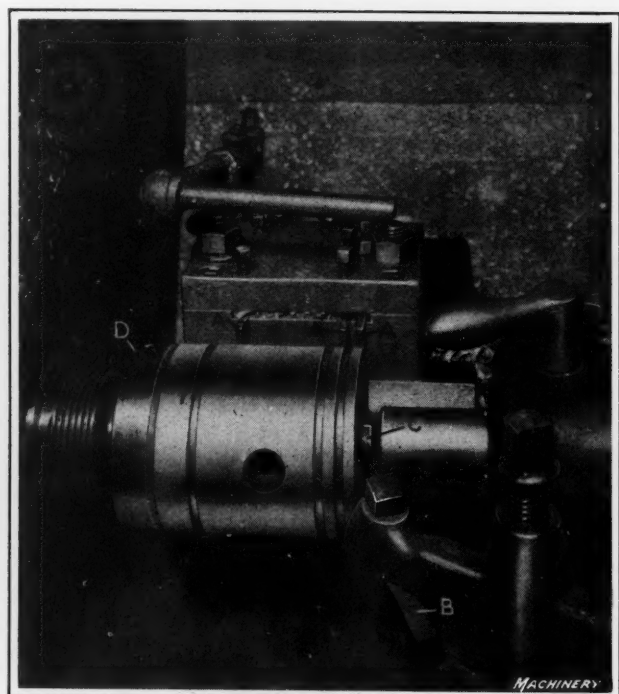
Turning the Outside Diameter and roughing out the Ring Grooves of Essex Pistons on a Short-bed Manufacturing Lathe
